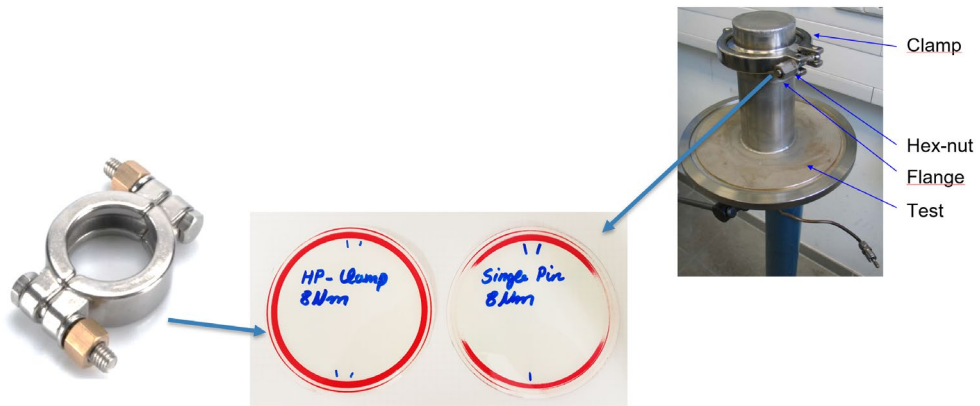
red fuji film showing load on DIN 32676 gasket caused by single-, and double-pin clamp
